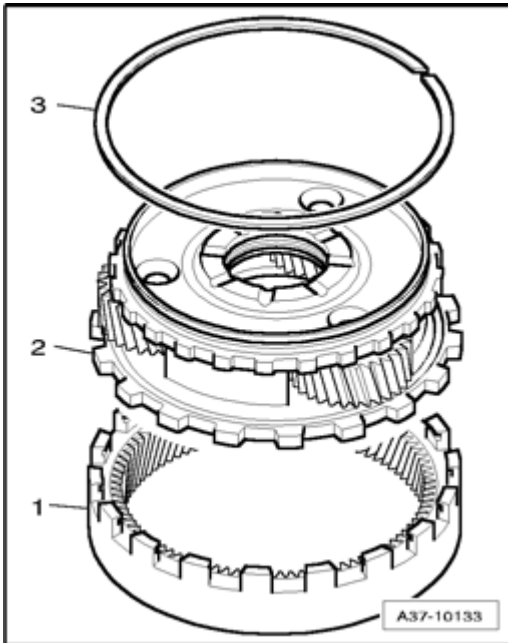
Planetary Carrier "I", Ring Gear "II" And Circlip
